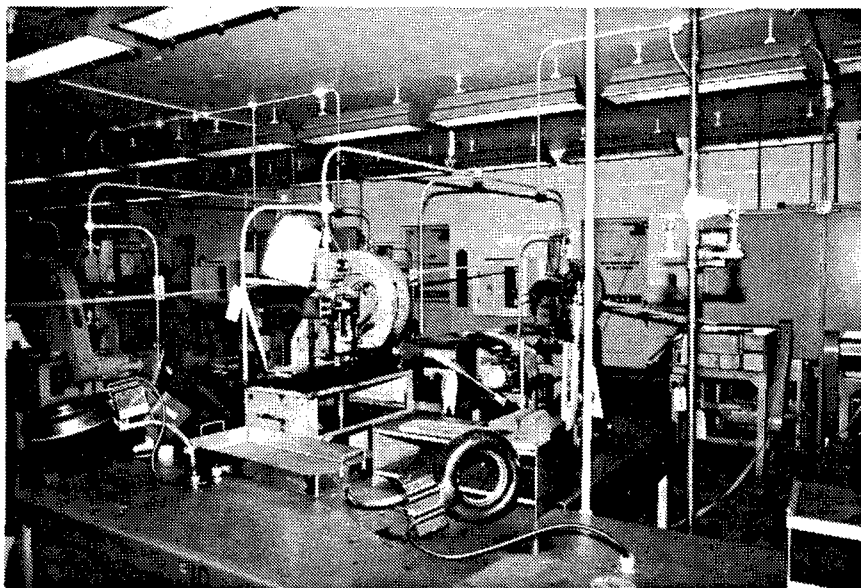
Building 135: Primer Charge and Assembly Work Station at the Primer Manufacturing Plant.
